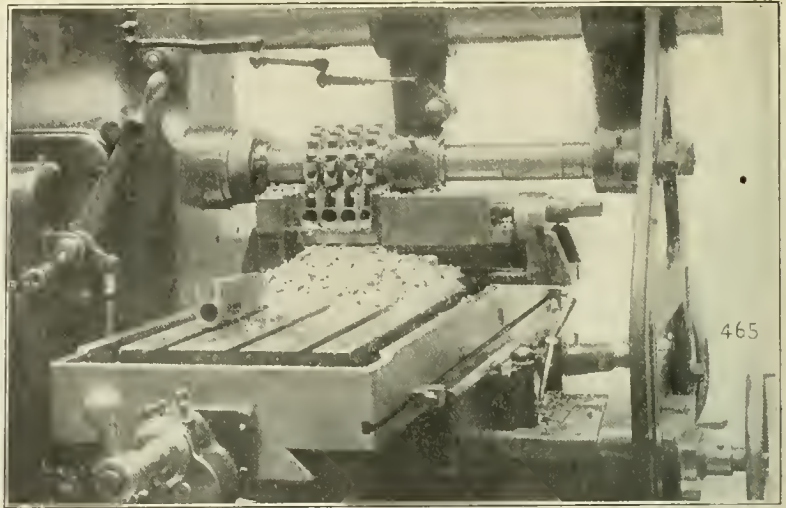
PLAIN HORIZONTAL MILLING MACHINE REMOVING $8\frac{1}{2}$ CUBIC INCHES OF DROP-FORGED STEEL PER MINUTE.
